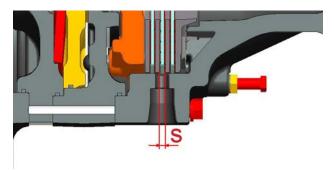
Checking brake distance with the T1 go / no-go gauge.
